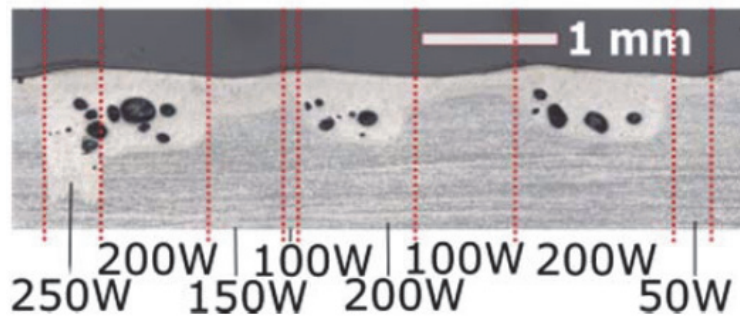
Cross section of the weld with different power inputs leading to conduction weld, keyhole weld, or keyhole with porosity formation weld in a Titanium plate [134]
